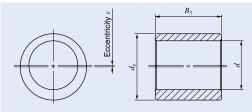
Length of the mounting hole of Eccentric Type Cam Follower
